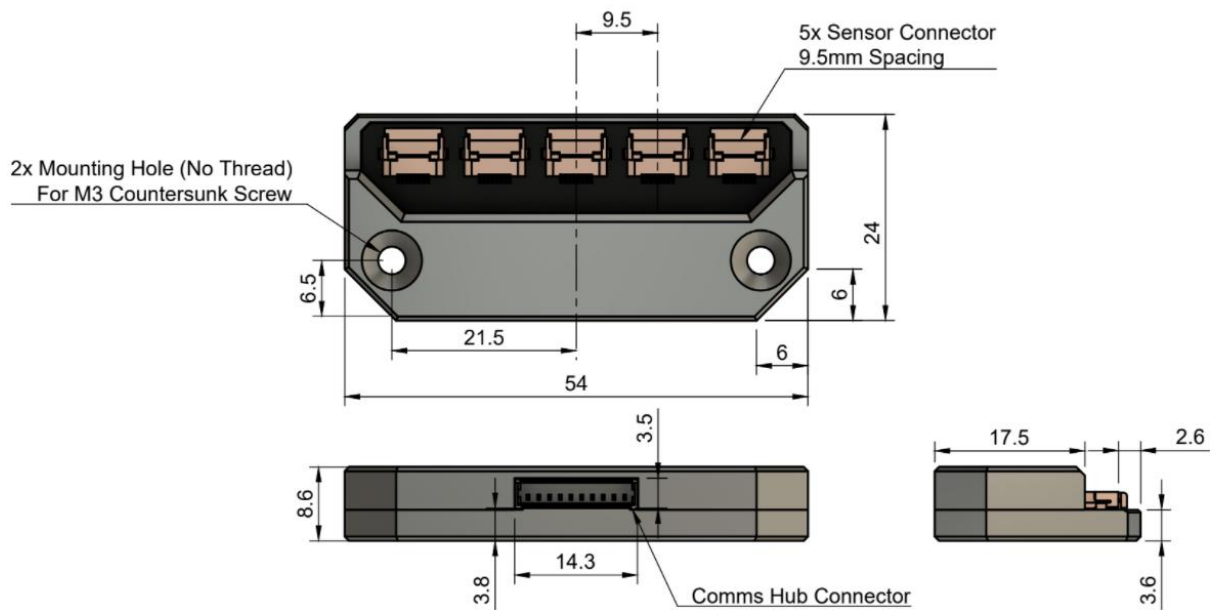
Mechanical drawing of Adaptor (Beta v1.0). All dimensions are in mm.
